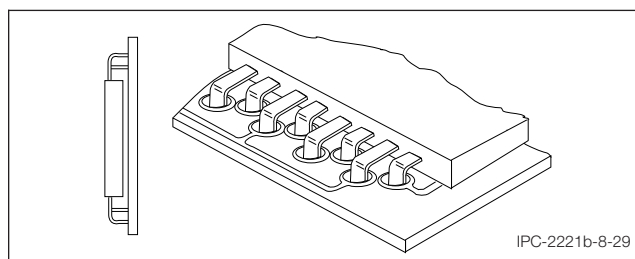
Examples of Configuration of Ribbon Leads for Through-Hole Mounted Flat-Packs
